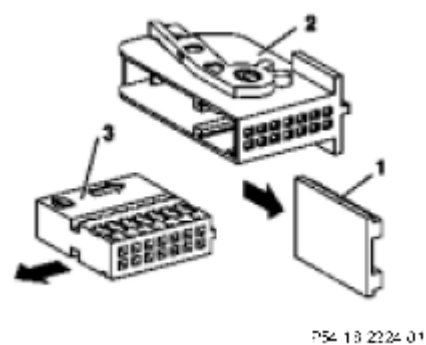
Connector Housing From Cap - Shown On 14-Pin MQS Coupling With A Connector Housing
